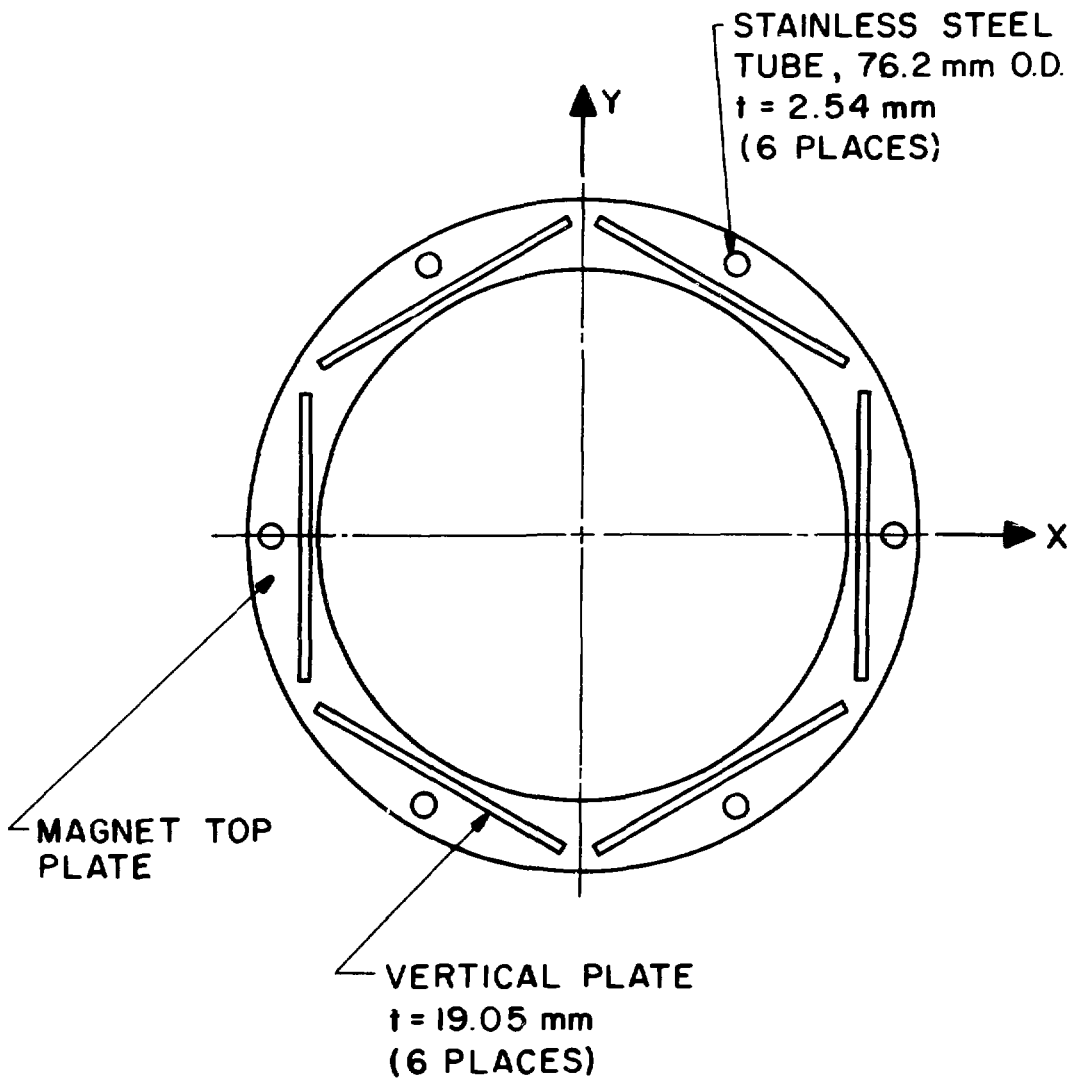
Plan view of current design of the support concept illustrating shear panel and vertical strut placement.
